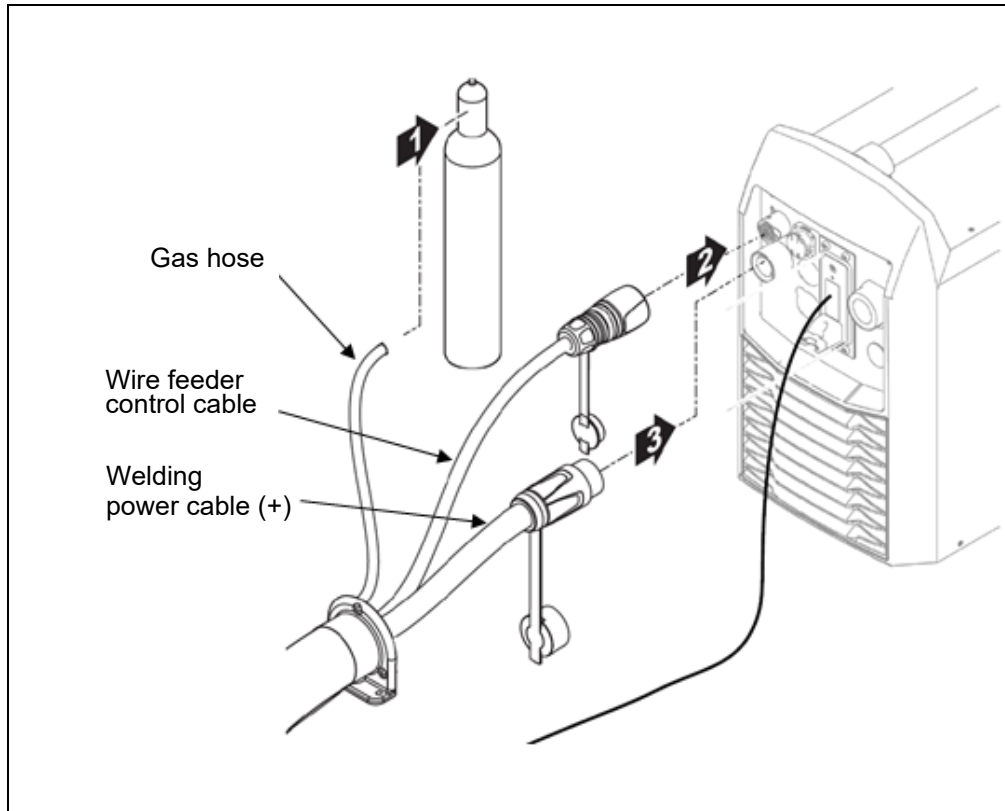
(a) Connection of welding power supply (1/2)
